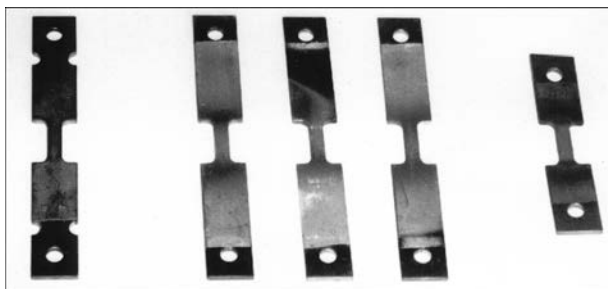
Flat tensile testing specimens of 5VMTs alloy with a four-layer protective coating
